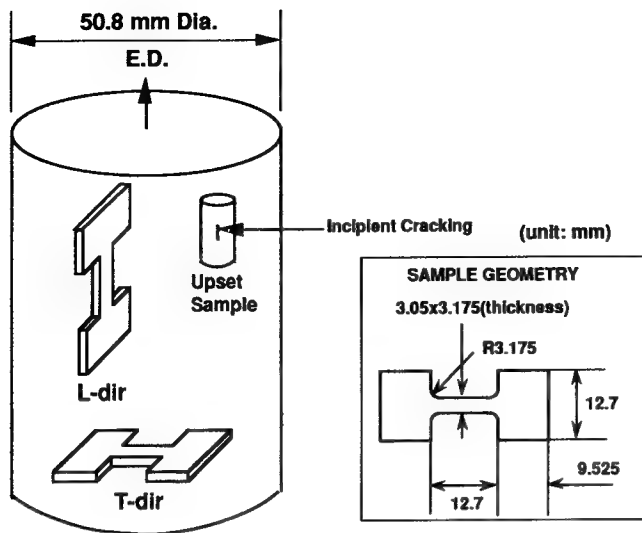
Sample dimensions and testing directions for uniaxial-tension test.
